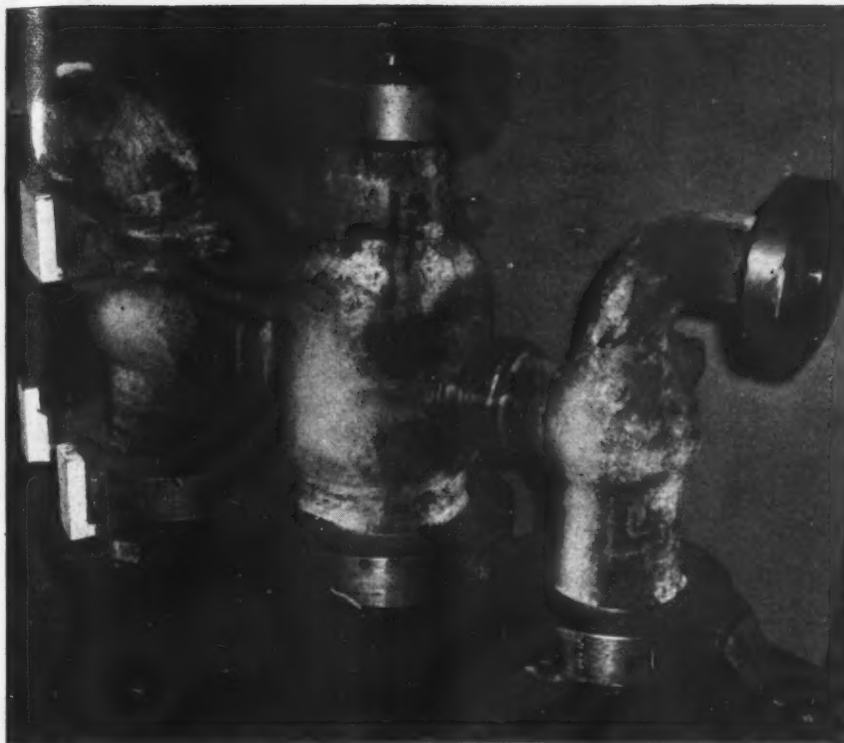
Steam strainer and valve assembly made in three separate castings, with welded-on brackets and bosses.
